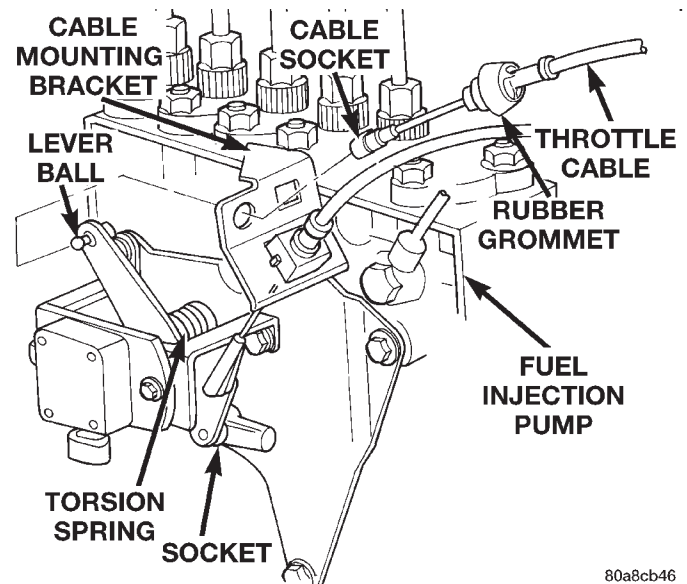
Throttle Cable at Injection Pump—Diesel Engine
